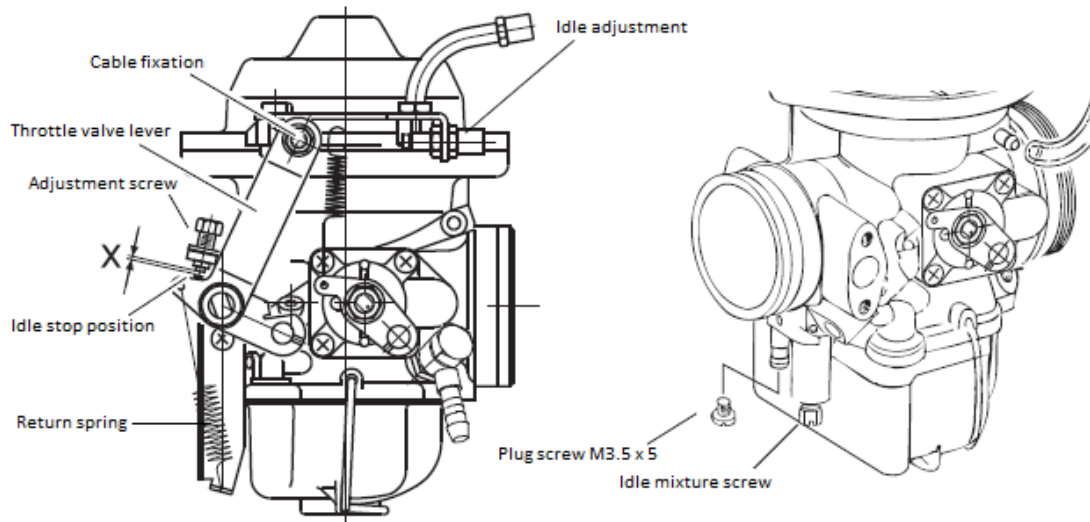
Mechanical Carburettor Synchronization
